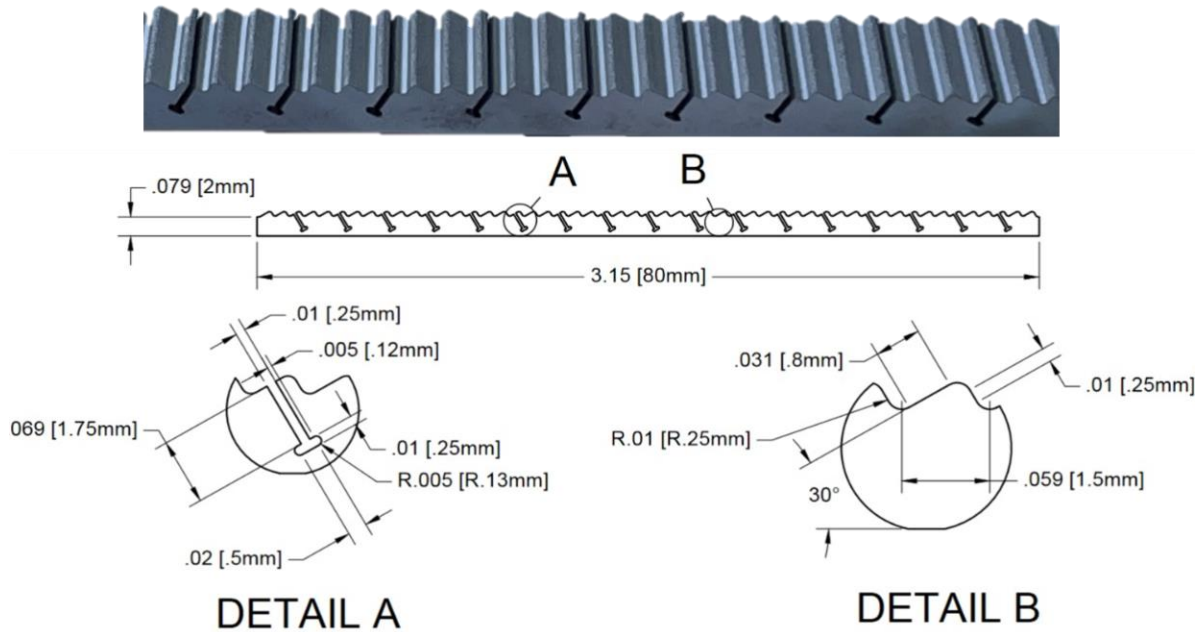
The detailed test surface dimensions of the 60°-30° slot test surface. The hammerhead slots are located on every third sawtooth. A picture of the fabricated surface is shown on top.
